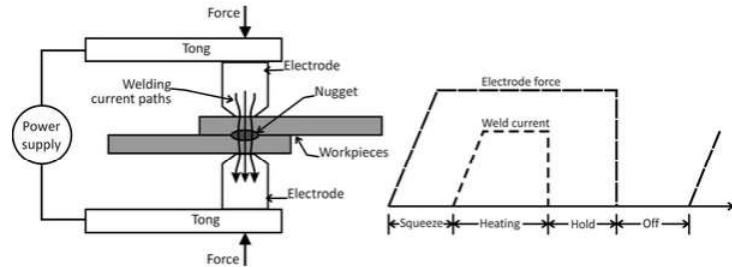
Schematic diagram of resistance spot welding system
